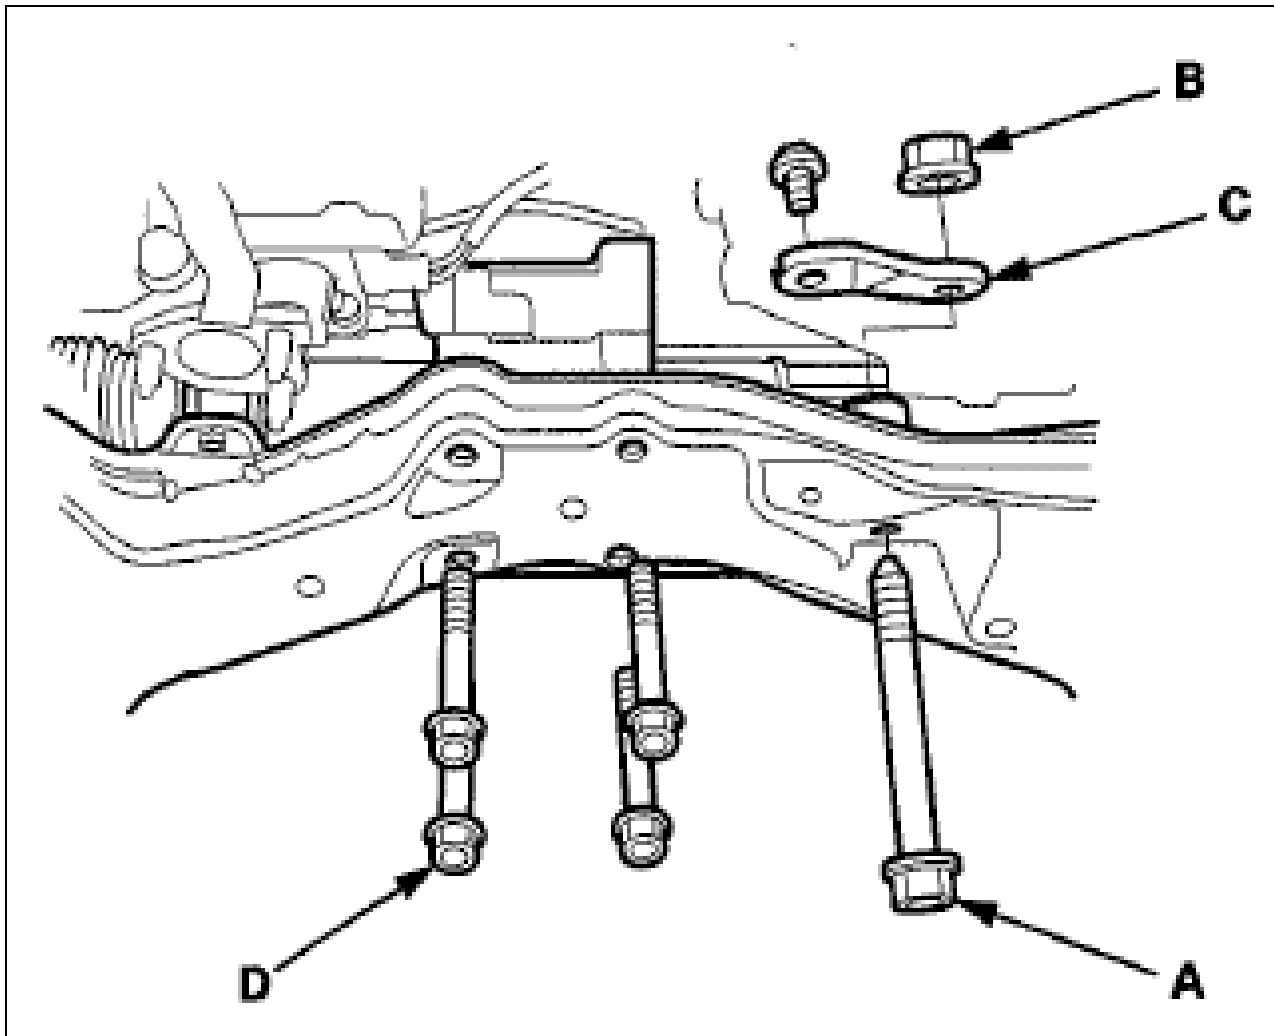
Identifying P/S Heat Shield And Steering Gearbox Mounting Bolt
